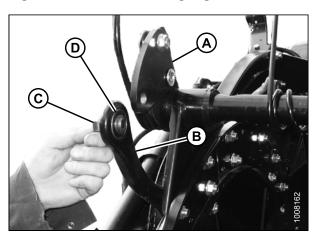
Bar Crank Attachment Holes and Link Alignment
